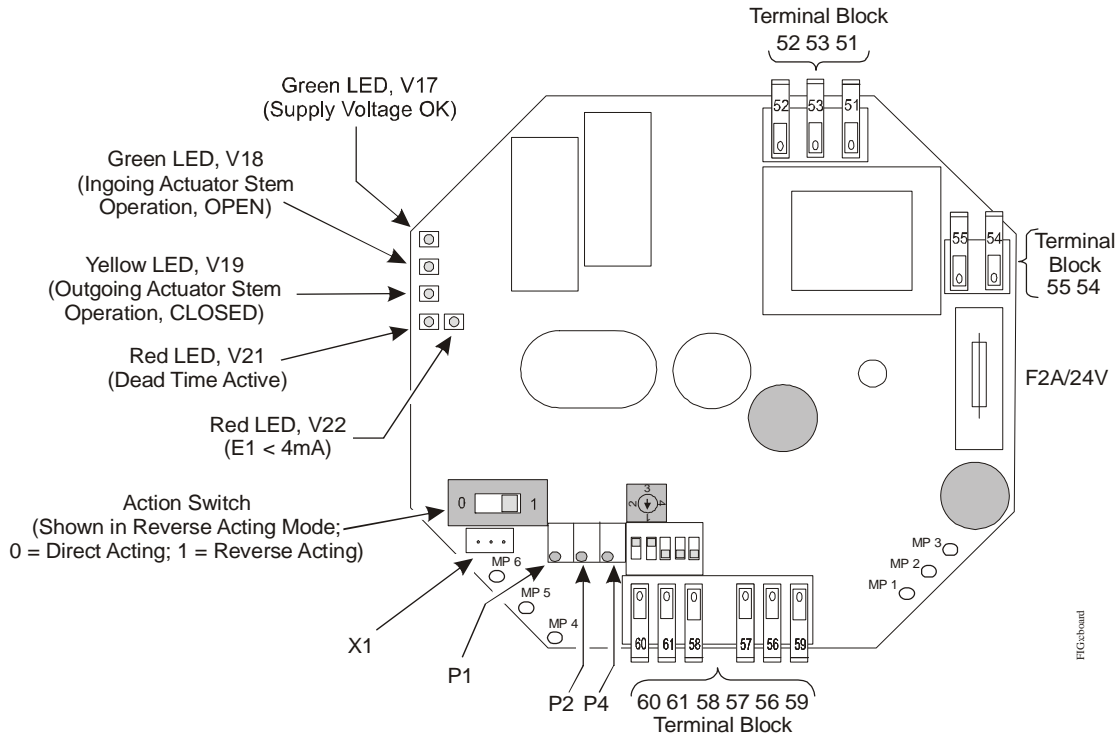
VA-6100-HGC Circuit Board Parts and Light-Emitting Diode (LED) Identification
